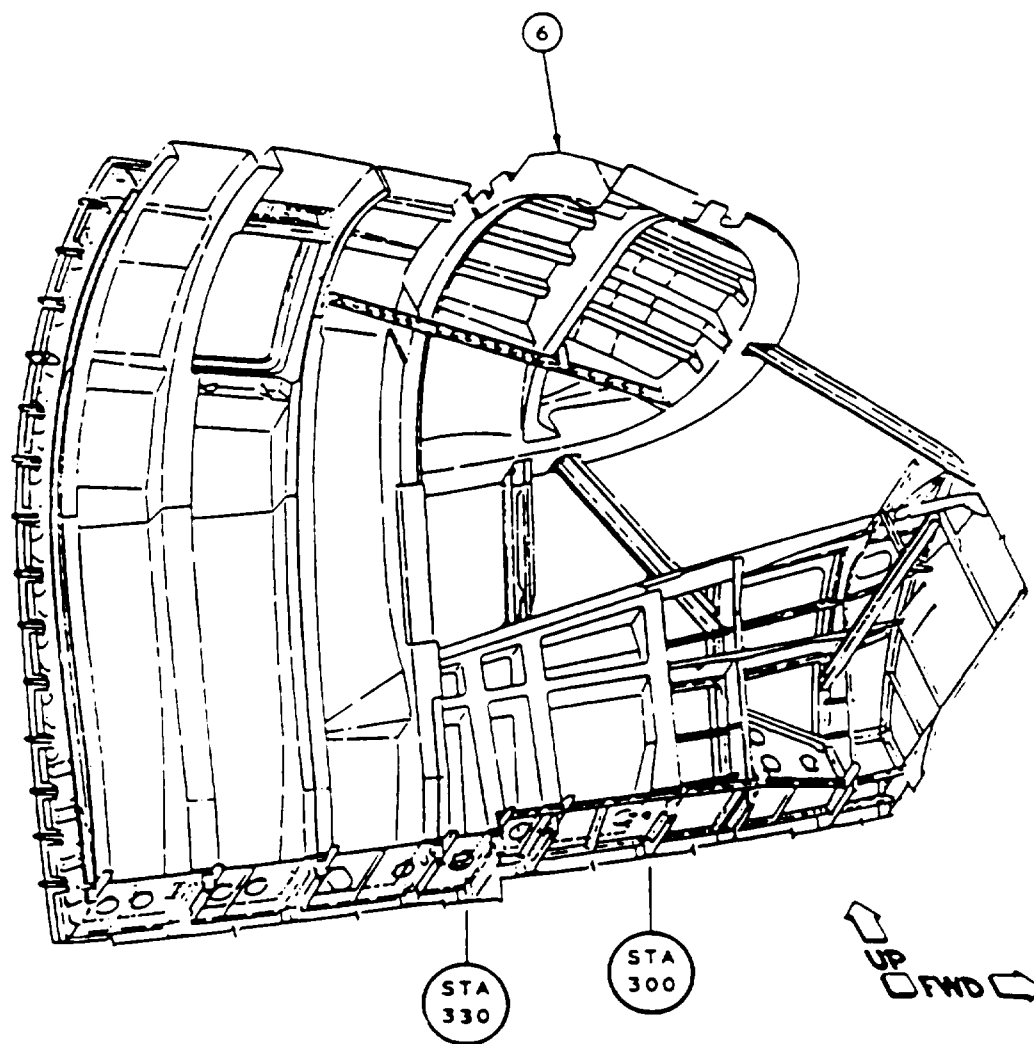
FLIGHT DECK LAP JOINT INTERNAL ACCESS
